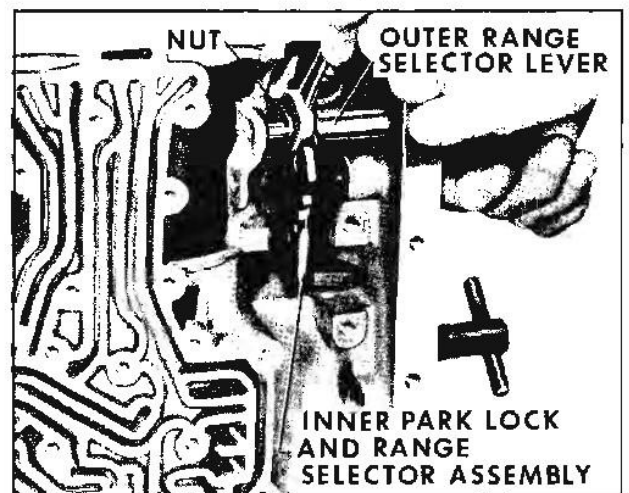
B-117 Installing Inner Park Lock and Range Selector Assembly
